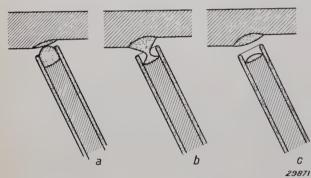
Transfer of liquid material from the welding rod to the piece of work.
